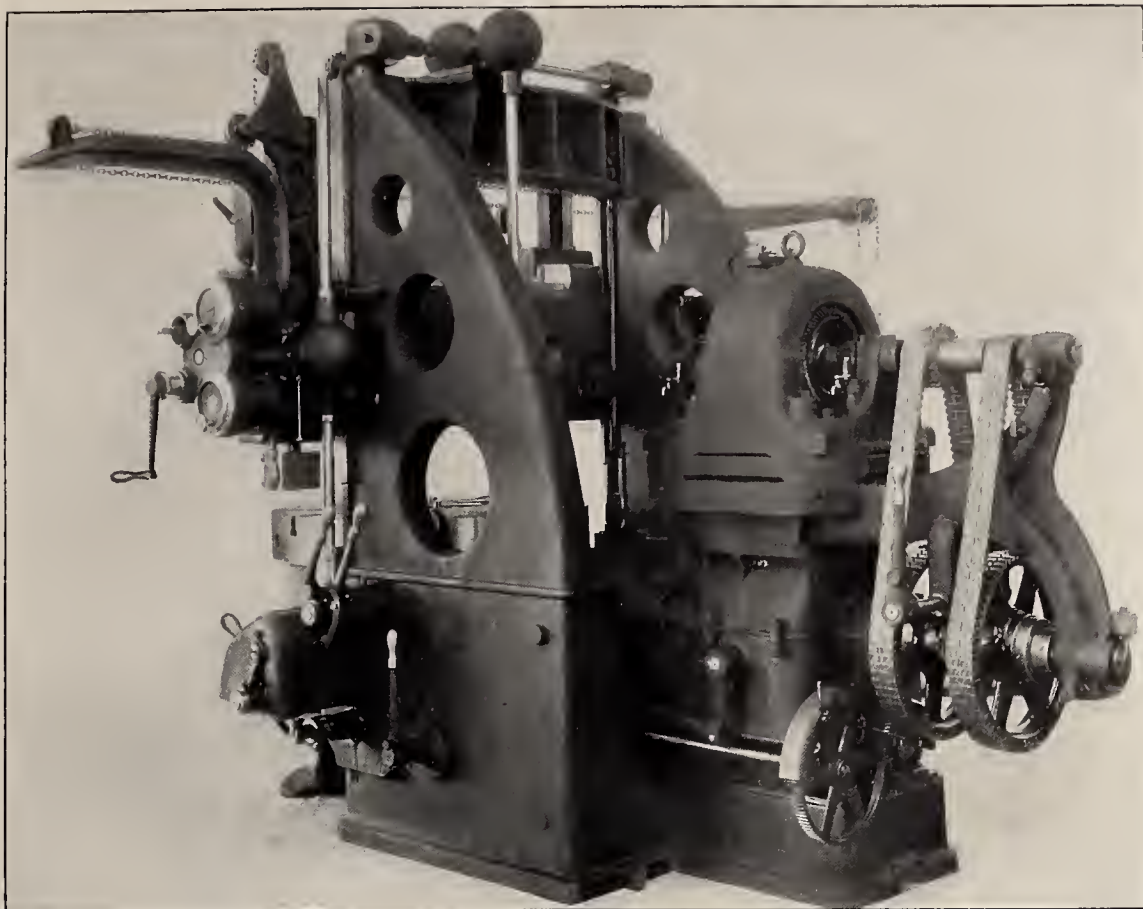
A VERTICAL BORING AND TURNING MILL BUILT BY THE GISHOLT MACHINE COMPANY, MADISON, WIS., DRIVEN BY A SINGLE-PHASE MOTOR BUILT BY THE WAGNER ELECTRIC MANUFACTURING COMPANY, ST. LOUIS, MO. TWO DIFFERENT SPEEDS OF THE MAIN SHAFT OF THE MILL ARE OBTAINED BY MEANS OF THE TWO DRIVING CHAINS SHOWN
